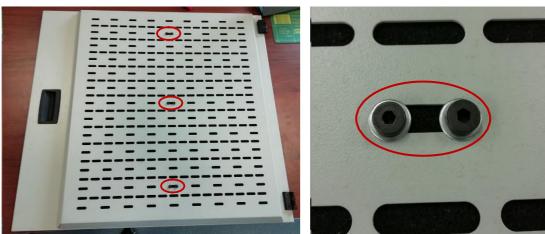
Unscrewing 6 DIN7984-M4x6 screws from the top cover of the printer
